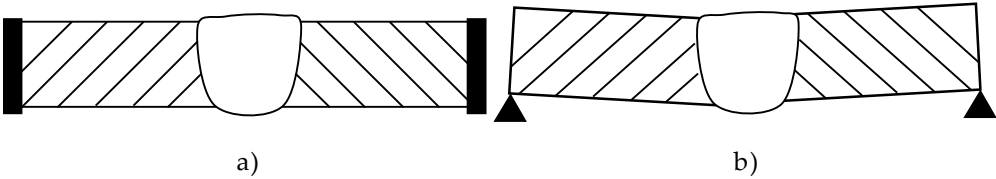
Test parts placing examples: Properly clamped (a) and simply supported (b)
